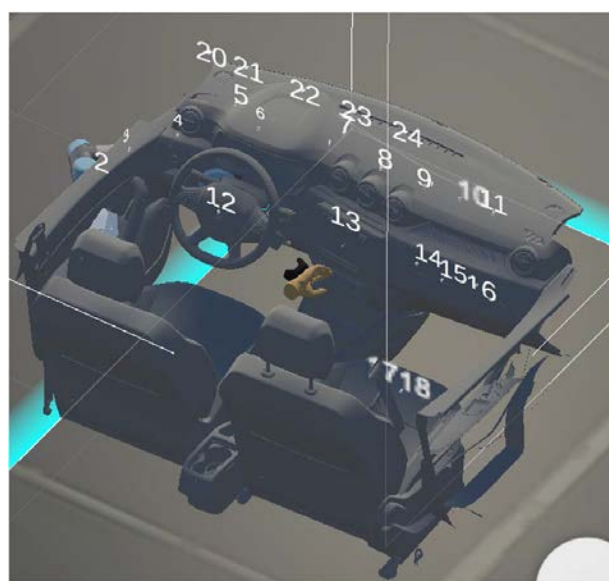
Location of the ROI 1-18 inside the car and safe-points 20-24
